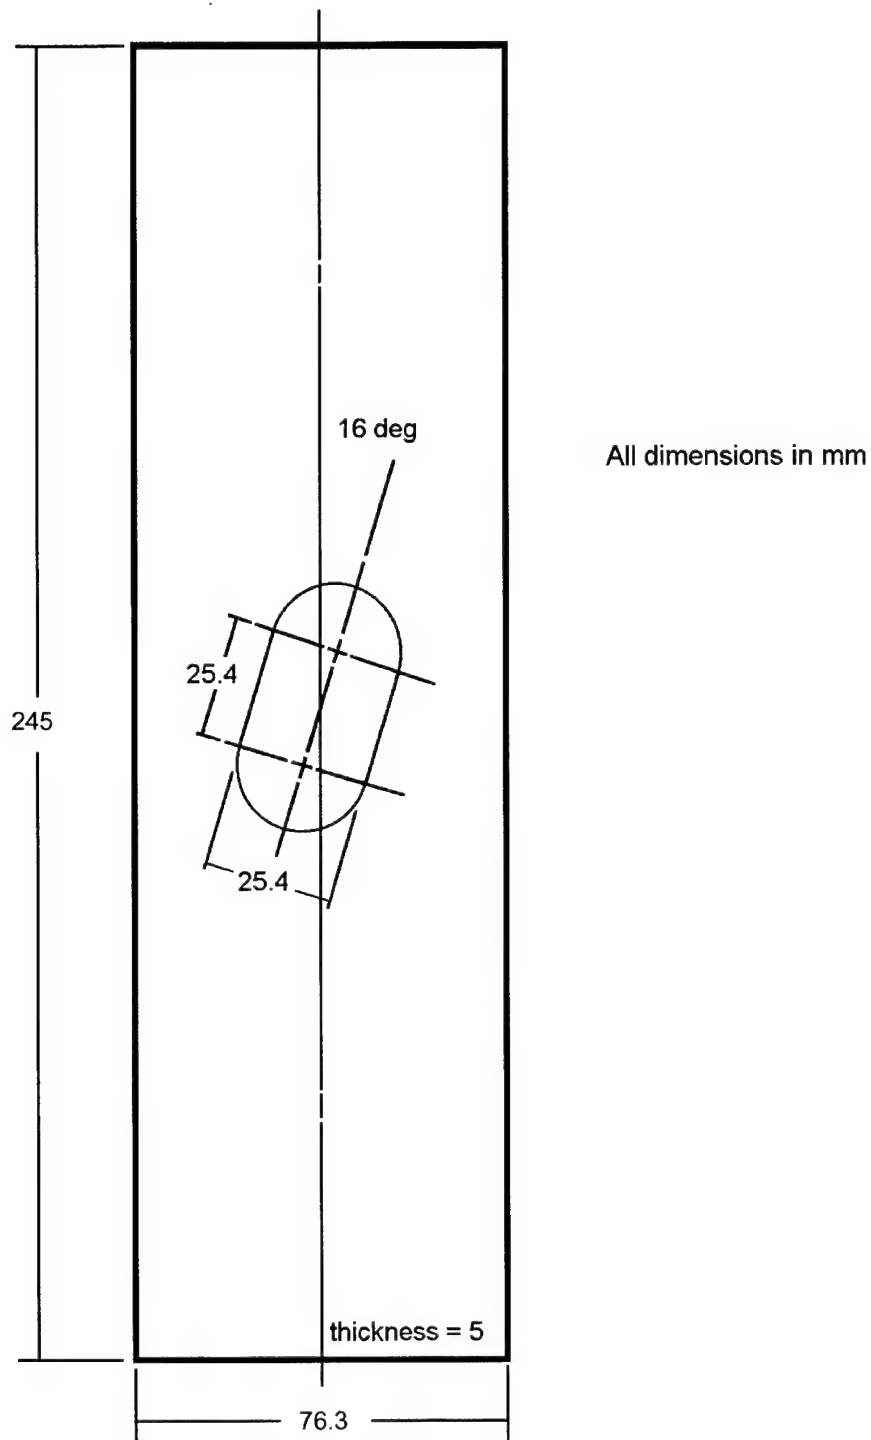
Geometry of plate specimen representative of an oversized fuel flow vent hole 13.
